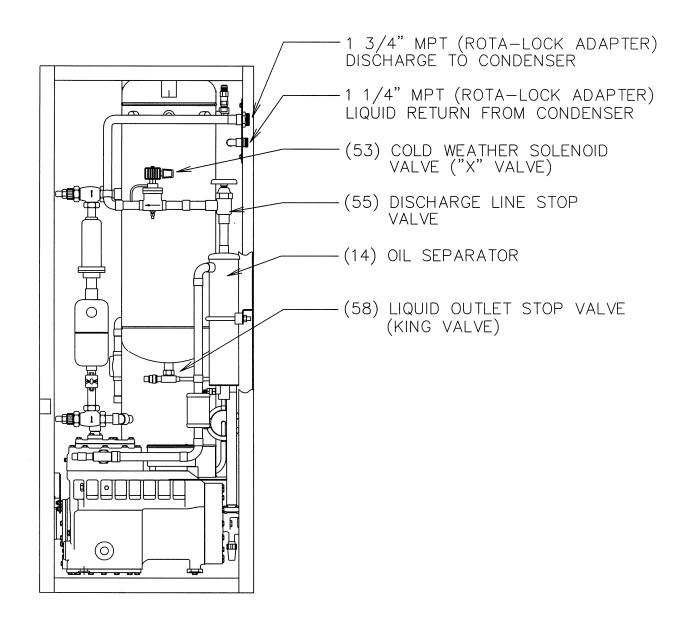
Assembly (Air-Cooled) Right Side View
